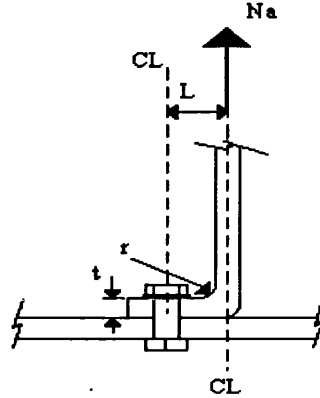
Typical Rib Foot Flange Bolted to Wing Skin
